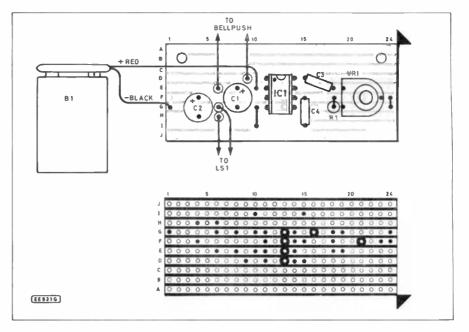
Circuit board component layout, details of breaks to be made in the underside copper tracks and wiring details to the speaker LS1 and bellpush S1. An i.c. holder should be used to mount IC1 on the board.
